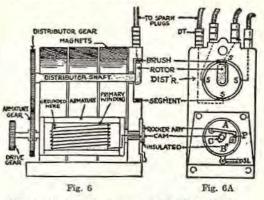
Note how the distributor shaft is driven by the gear on the armature,
